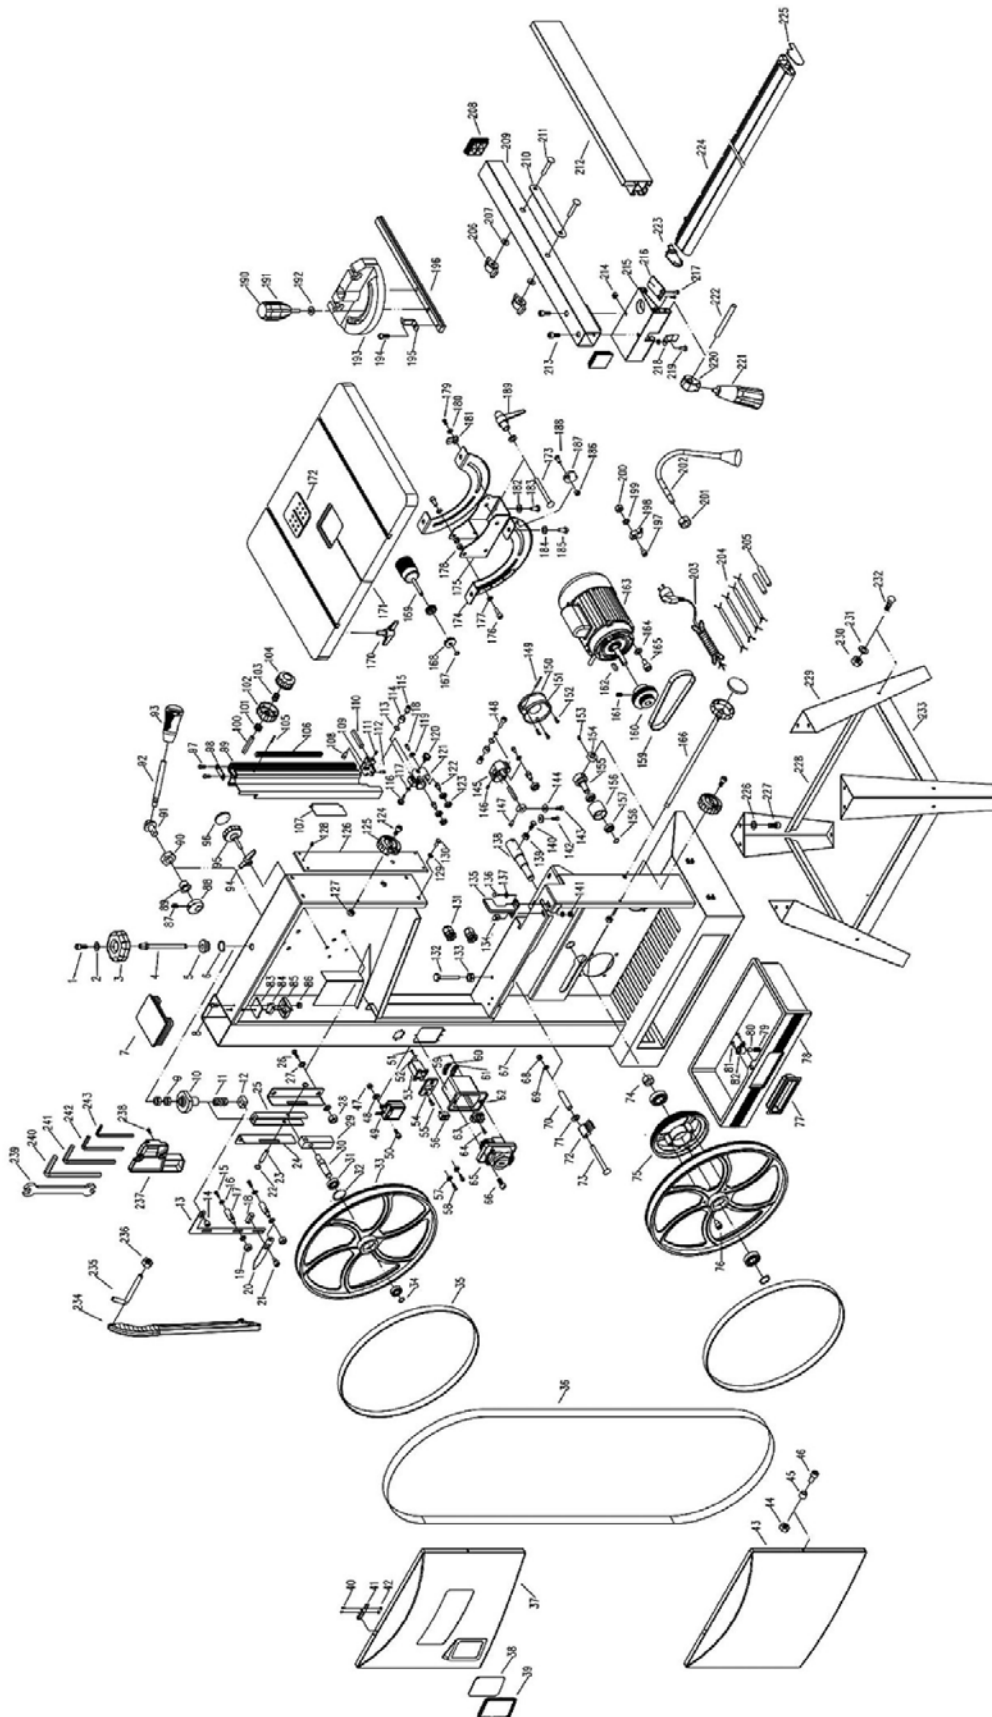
Spare parts drawing 3 - Wood Band Saw HBS 321-2 and 361-2
